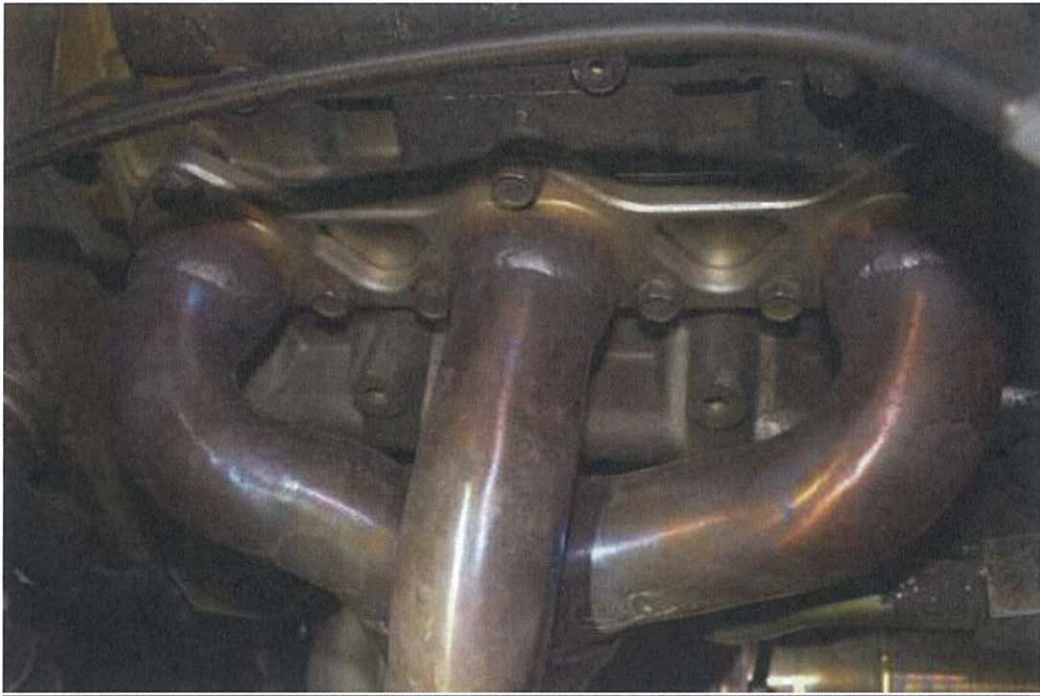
Right Exhaust Manifold not replaced and untouched rusted bolt
